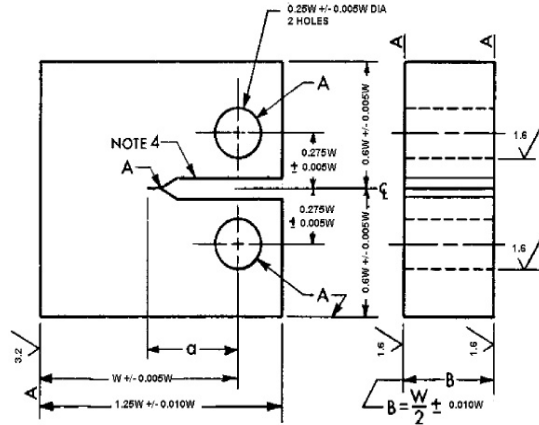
Compact tensile Specimen - Standard Proportions and Tolerances
